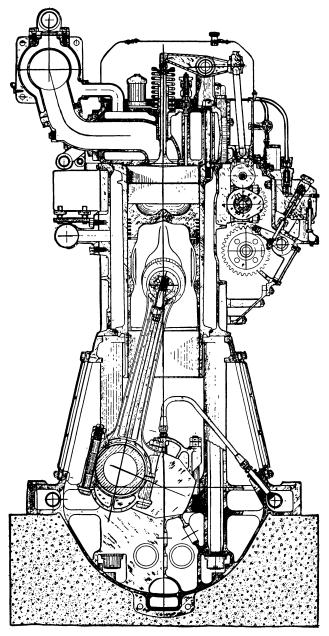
Cooper Bessemer Diesel Engine, Type EN.
